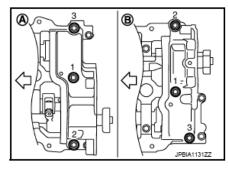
Camshaft Mounting Bolt Tightening Sequence Courtesy of NISSAN NORTH AMERICA, INC.
